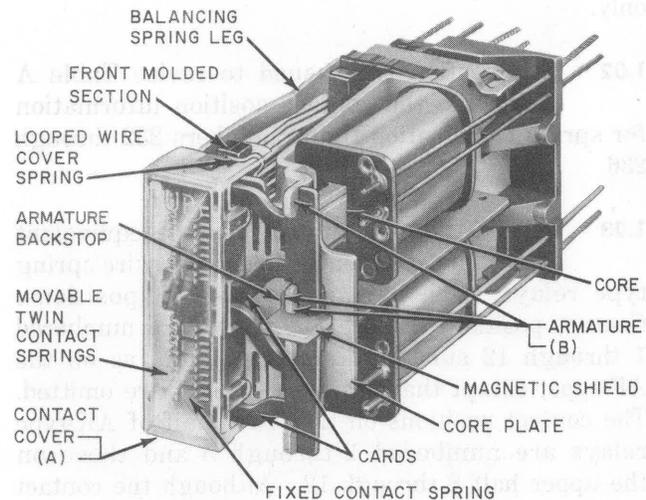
AK-Type Relay Having Looped Wire Cover Spring
